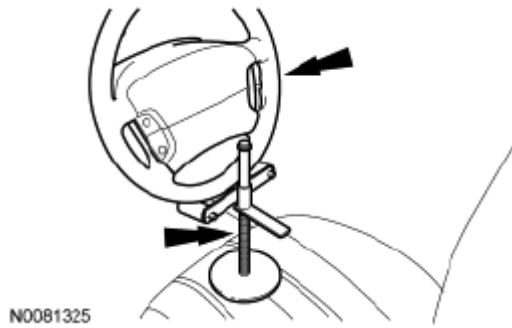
Holding Steering Wheel Using A Suitable Holding Device
